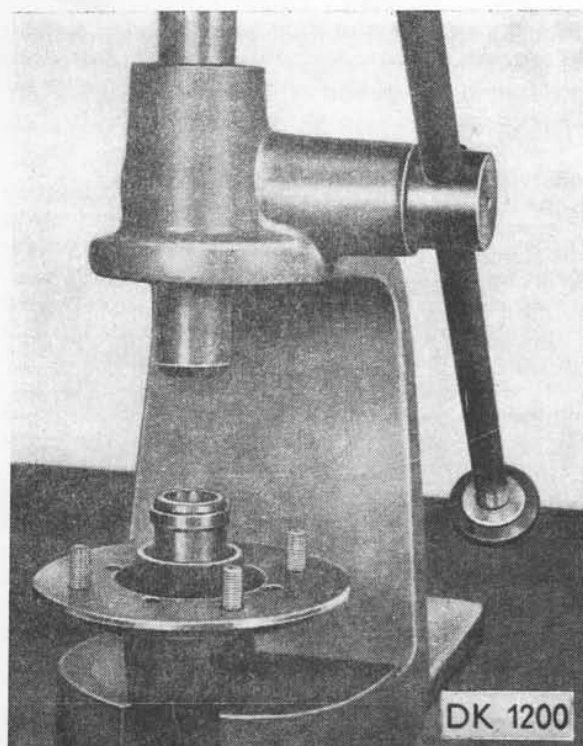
/3 - Pressing Out Tapered Roller Bearing Cup (larger) Using MP 6-129 Drift
